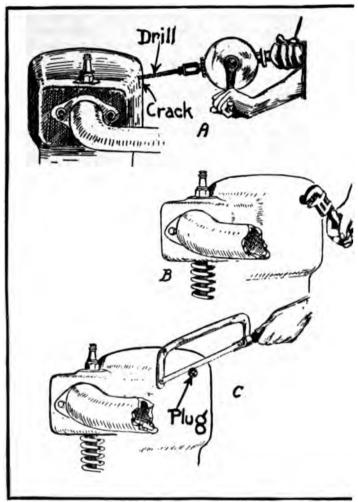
Method of Using Pipe Plug for Sealing Fine Oracks
